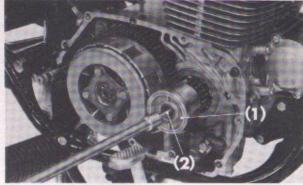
(1) Oil filter cap (2) 8mm bolt
